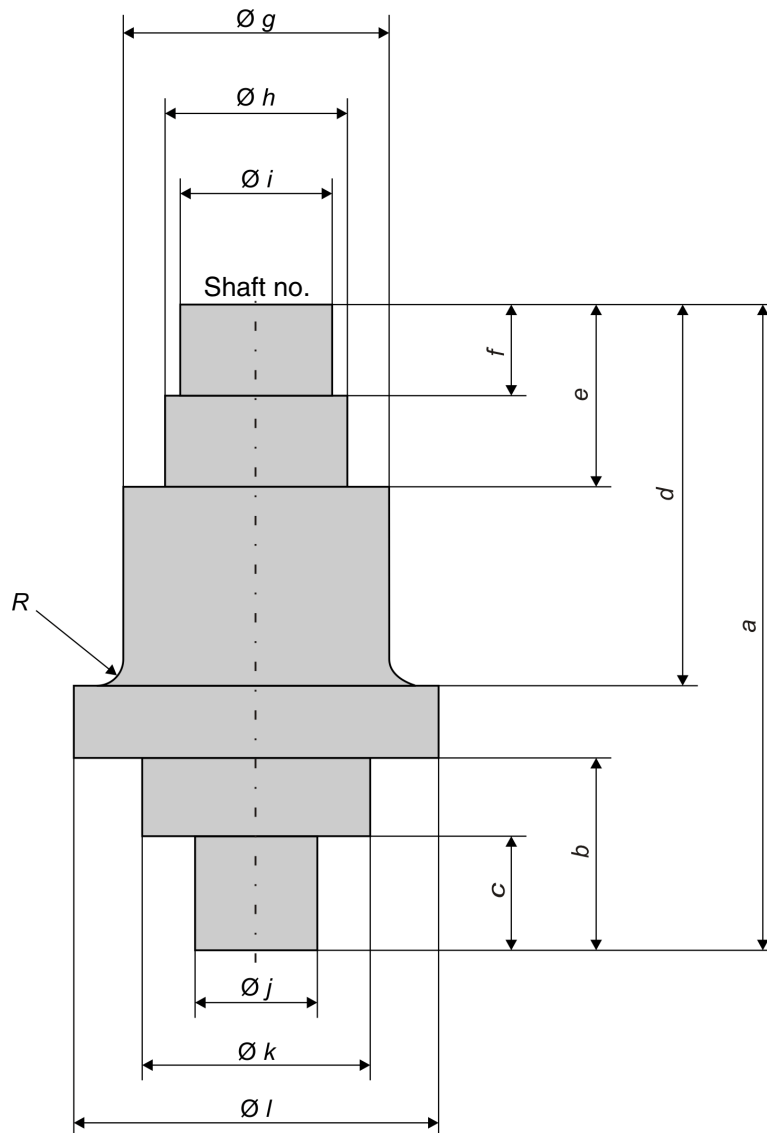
Dimension drawing of shafts, scale 1 : 1
